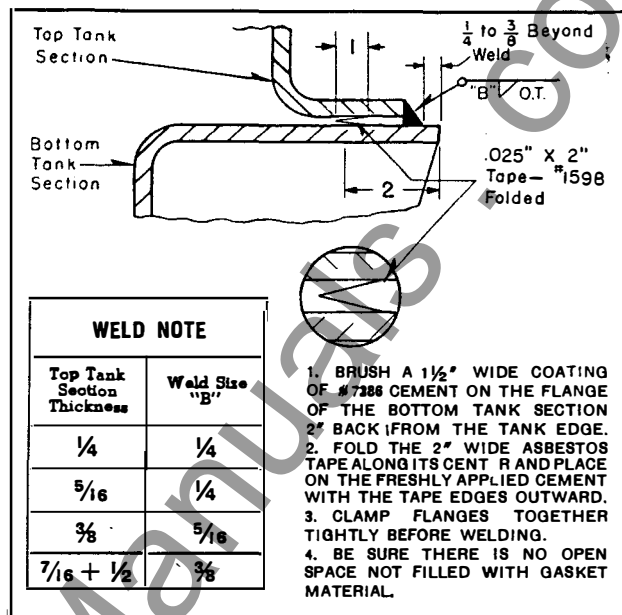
Joining of Flanges, "Form-Fit" Tank
